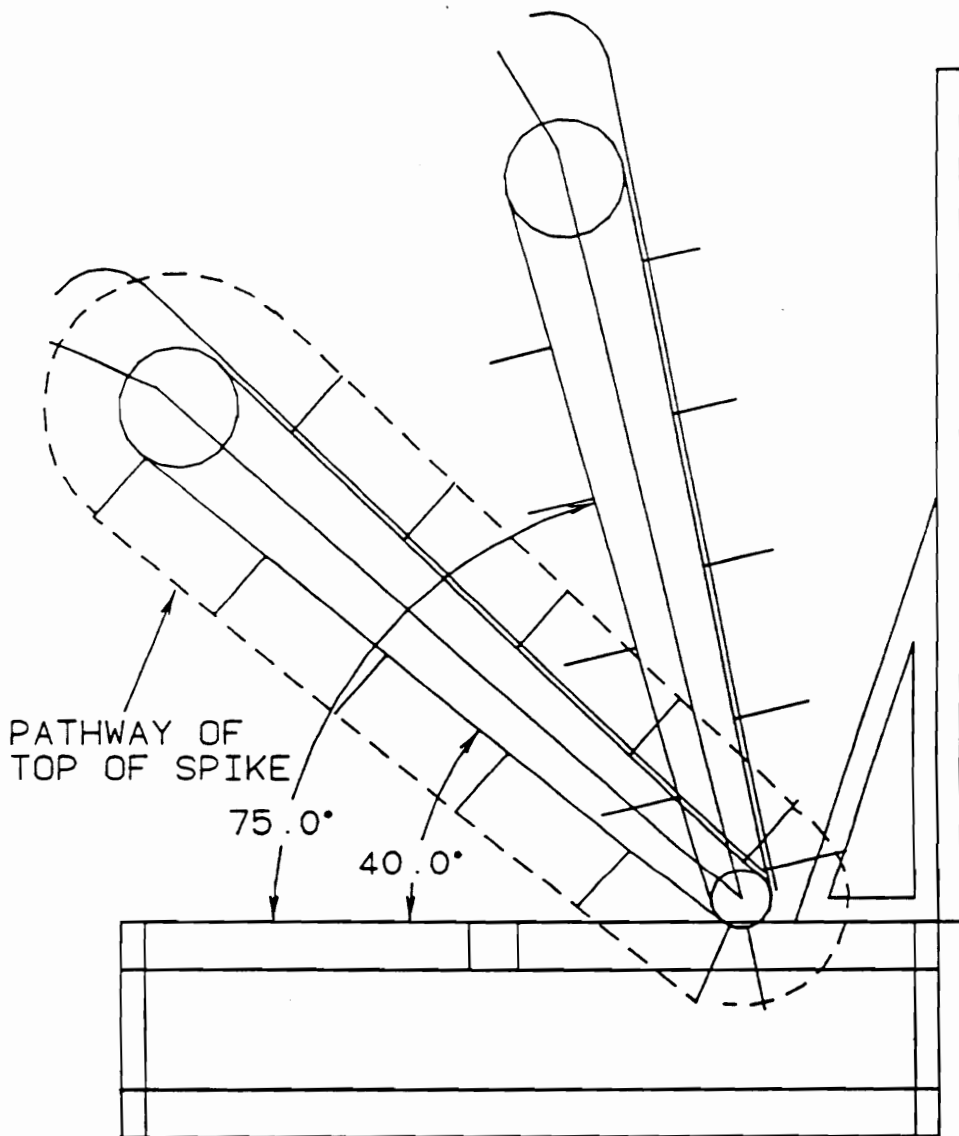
Rear view of cross conveyor at minimum and maximum angle.
